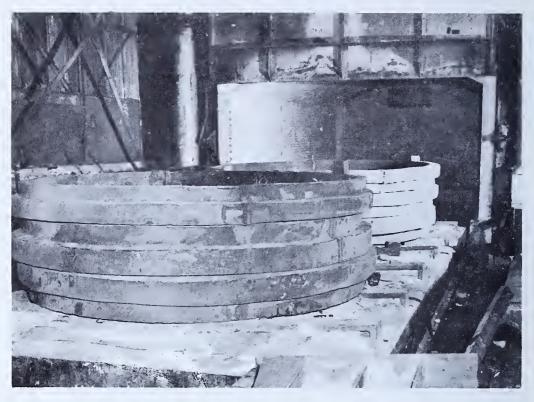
Preparing the Ring Flange for Stress Relieving
